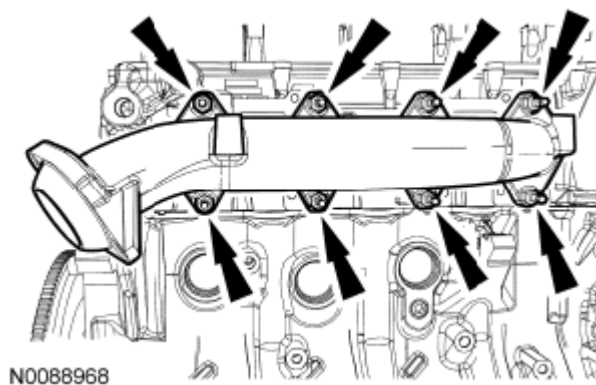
Locating RH Exhaust Manifold And Gaskets
